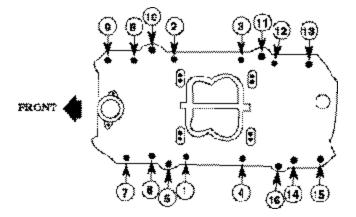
Intake Manifold Bolt Torque Sequence DO NOT USE A TORQUE WRENCH ON BOLTS 5, 10, 11, & 16 Hand Tighten Bolts using a 6" box end wrench. Tighten remaining bolts to 25 ft./lbs. in sequence shown.
